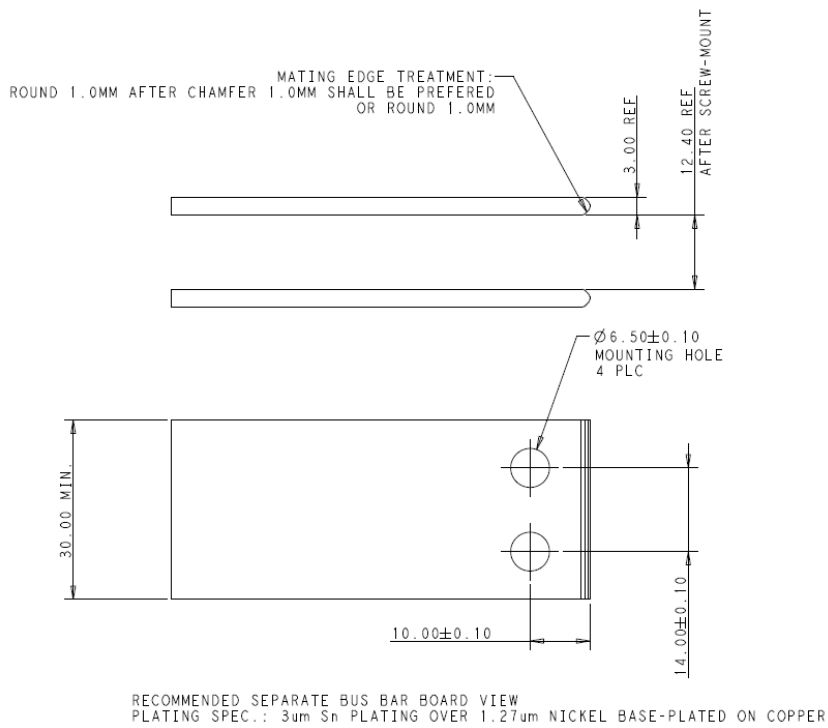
Separate Screw-Mounting Bus Bar Board View.
